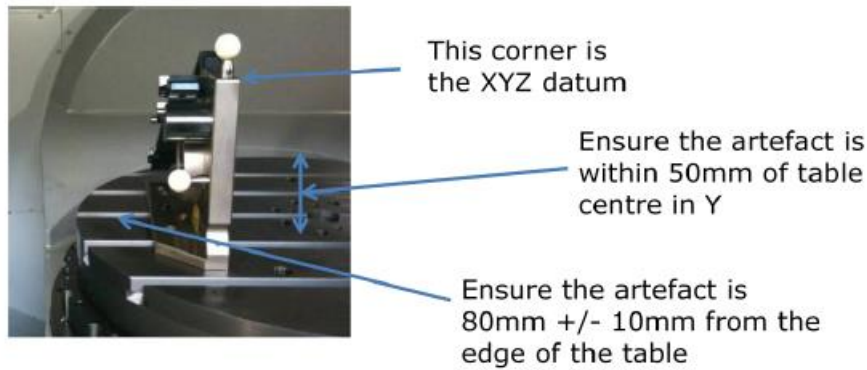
Zeiss Artefact ® Set-up within machine tool
